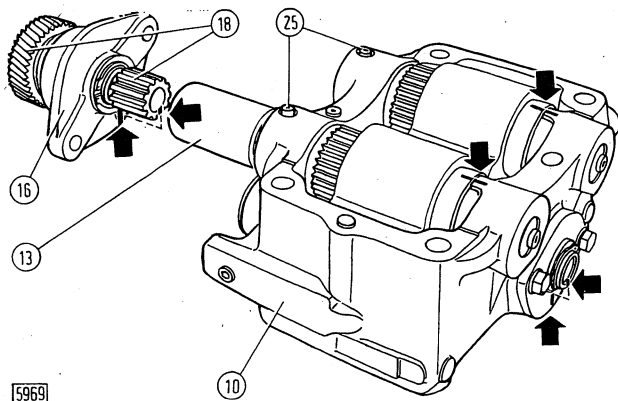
Arrangement and alignment of assembly marks for damper phasing.
